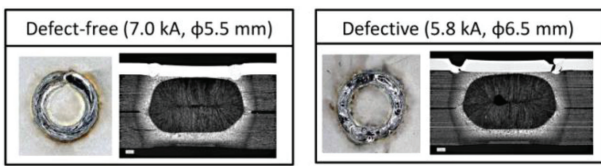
Surface appearance and macro cross-sections without and with defect in hybrid spot welding
